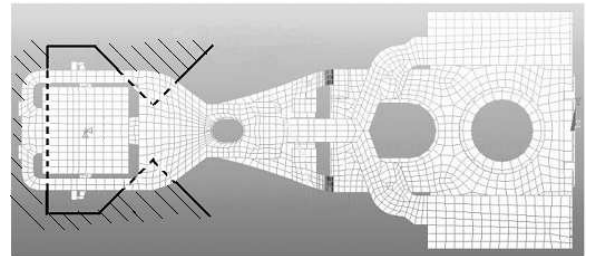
Drawing of suspension showing wire bonding fixture edges
